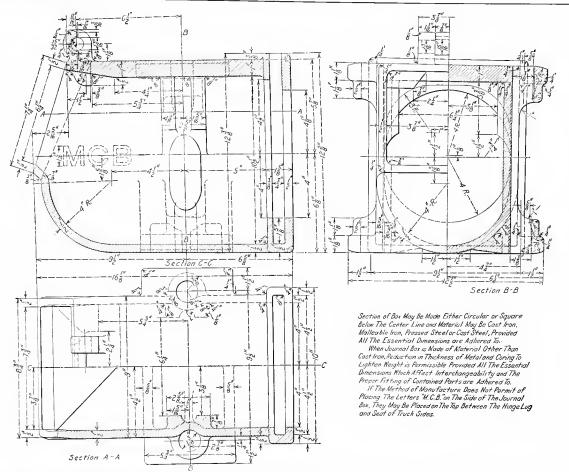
M. C. B. Standard Box for 51/2 in. by 10 in. Freight Car Journal. (M. C. B. Sheet 11.)
